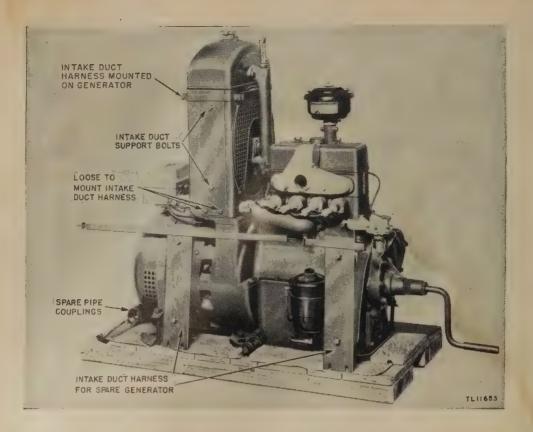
Power Unit PU-41/G, installation of intake ducts.
